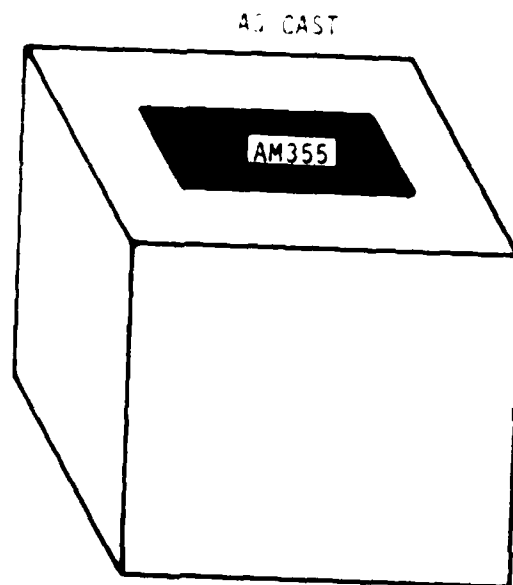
Matrix Supported Test Piece Prior to Tracer Milling.
